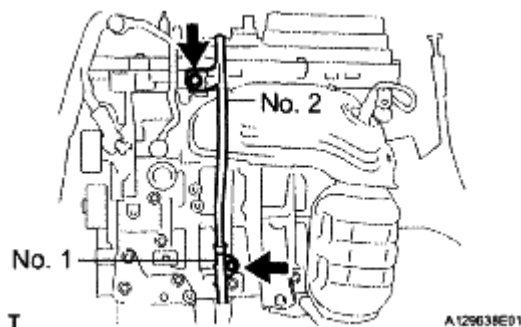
Identifying Oil Level Gauge Guide No. 1 & No. 2 Bolt
